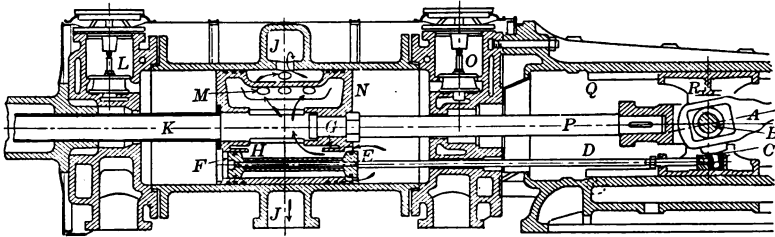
UNIFLOW ENGINE WITH AUXILIARY EXHAUST VALVE IN THE PISTON
